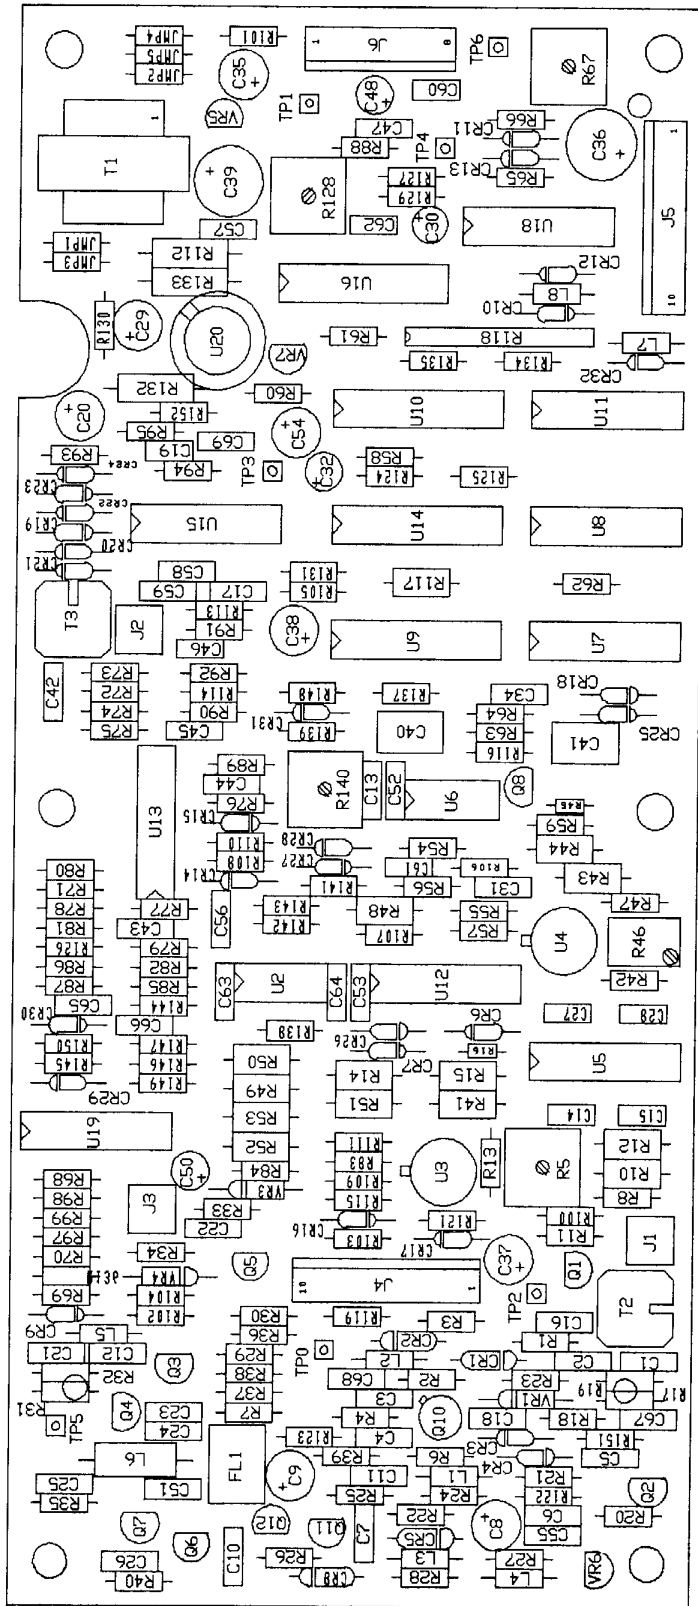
ISB IF/Audio Assembly A18 Component Locations (10215-6300, Rev. G)
